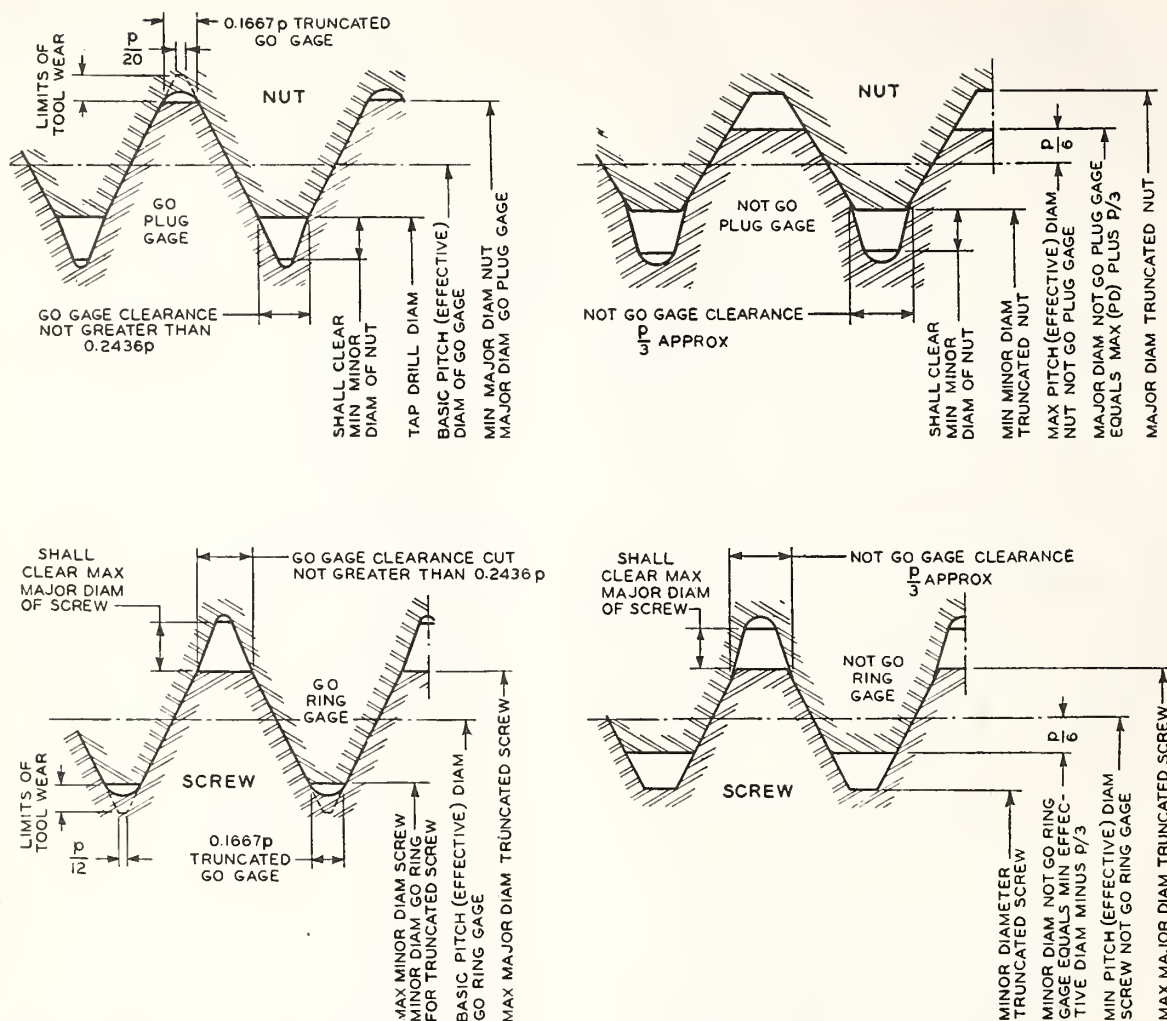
Profile of "go" and "not go" thread plug and ring gages for checking screw threads of Truncated Whitworth form.
